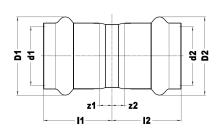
Dimensions (Example DN25) d1 = 28 mm; D1 = 37 mm l1, l2 = 30 mm; z1, z2 = 6 mm
